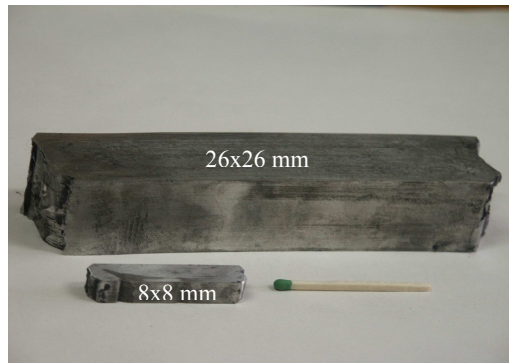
Larger size of UFG billet of 26x26 mm produced using the scaled-up two-turn, S-channel ECAP
